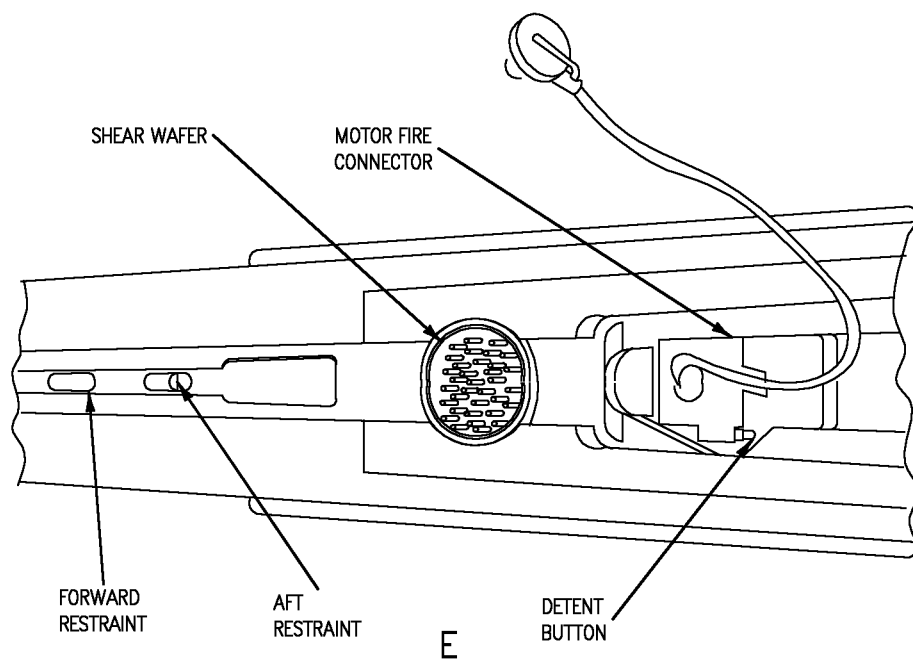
LAU-115 Launcher Inspection (Sheet 2)
